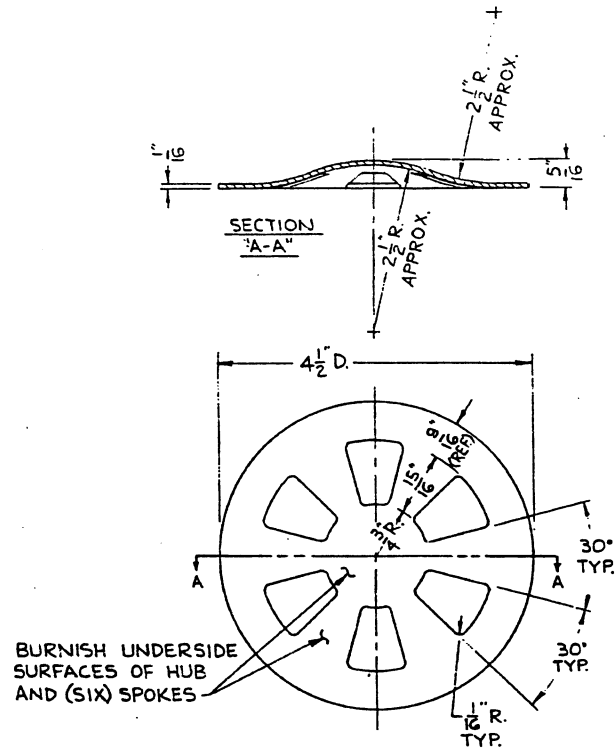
Cross-sectional and top view of the large solvent disperser that is used for 4.8-inch diameter sponge core barrels.
